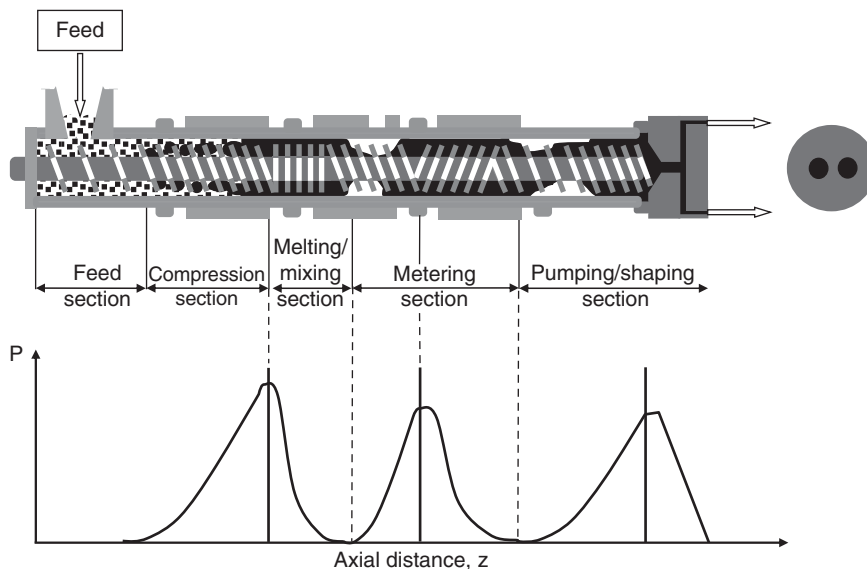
Thermomechanical processing in intermeshing, co-rotating twin screw extruders.
